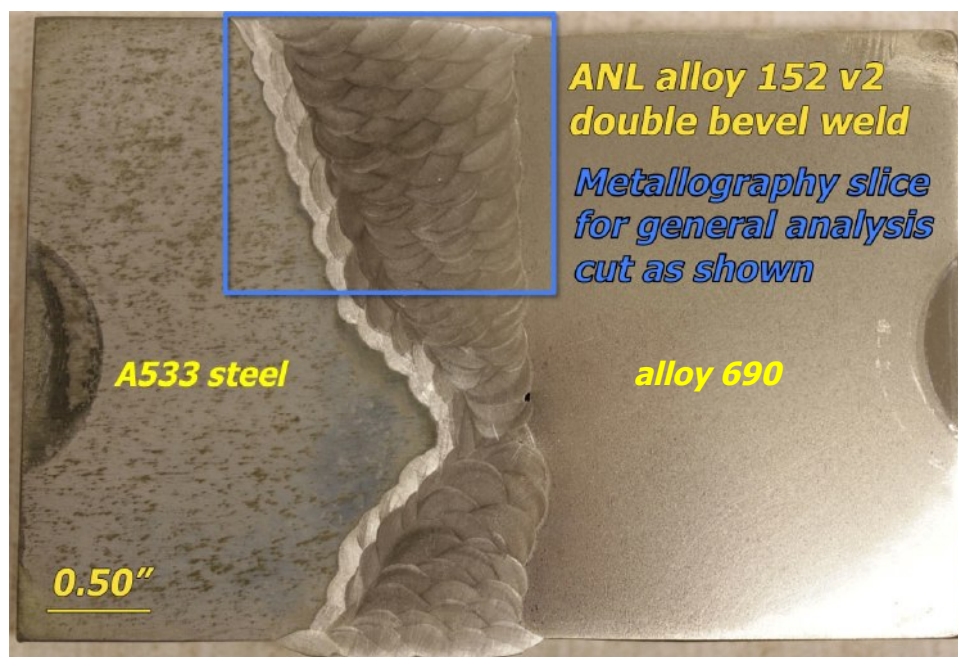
Optical macro image of a weld slice taken from the ANL alloy 152v2 weldment. Note that the weld orientation is flipped from drawing in Figure 2. Blue box indicates the WC04F6 weld region examined in more detail.
